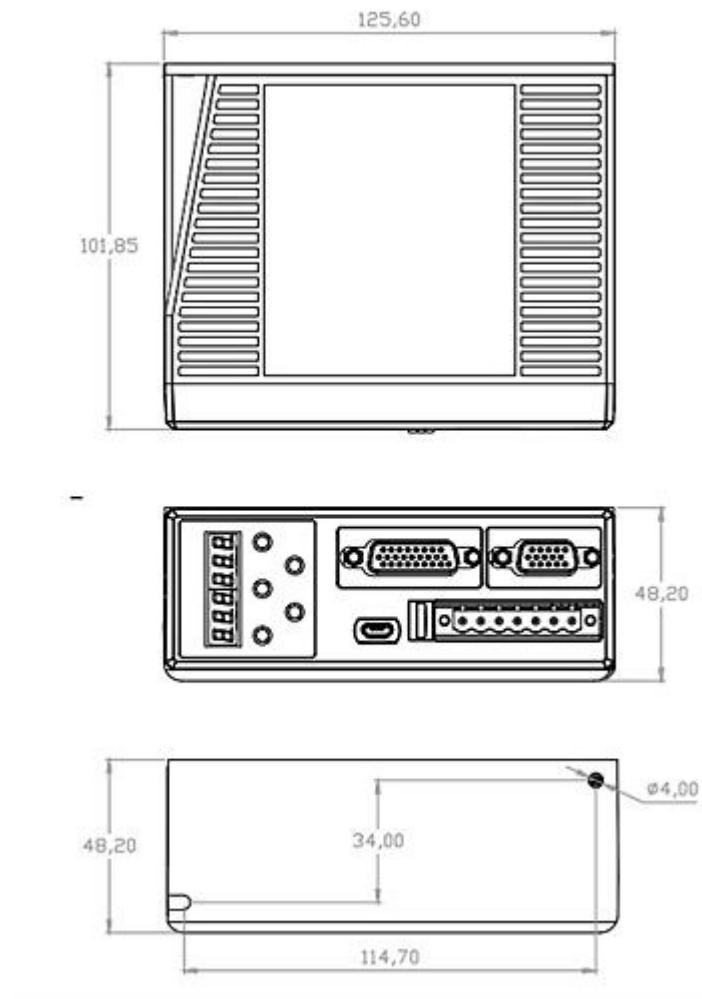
mechanical installation dimension drawing of 2HSS458-EC (unit: mm)
